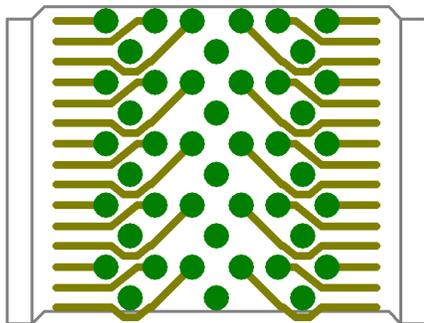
Backplane Single-Ended Breakout Pattern (1 Layer)
